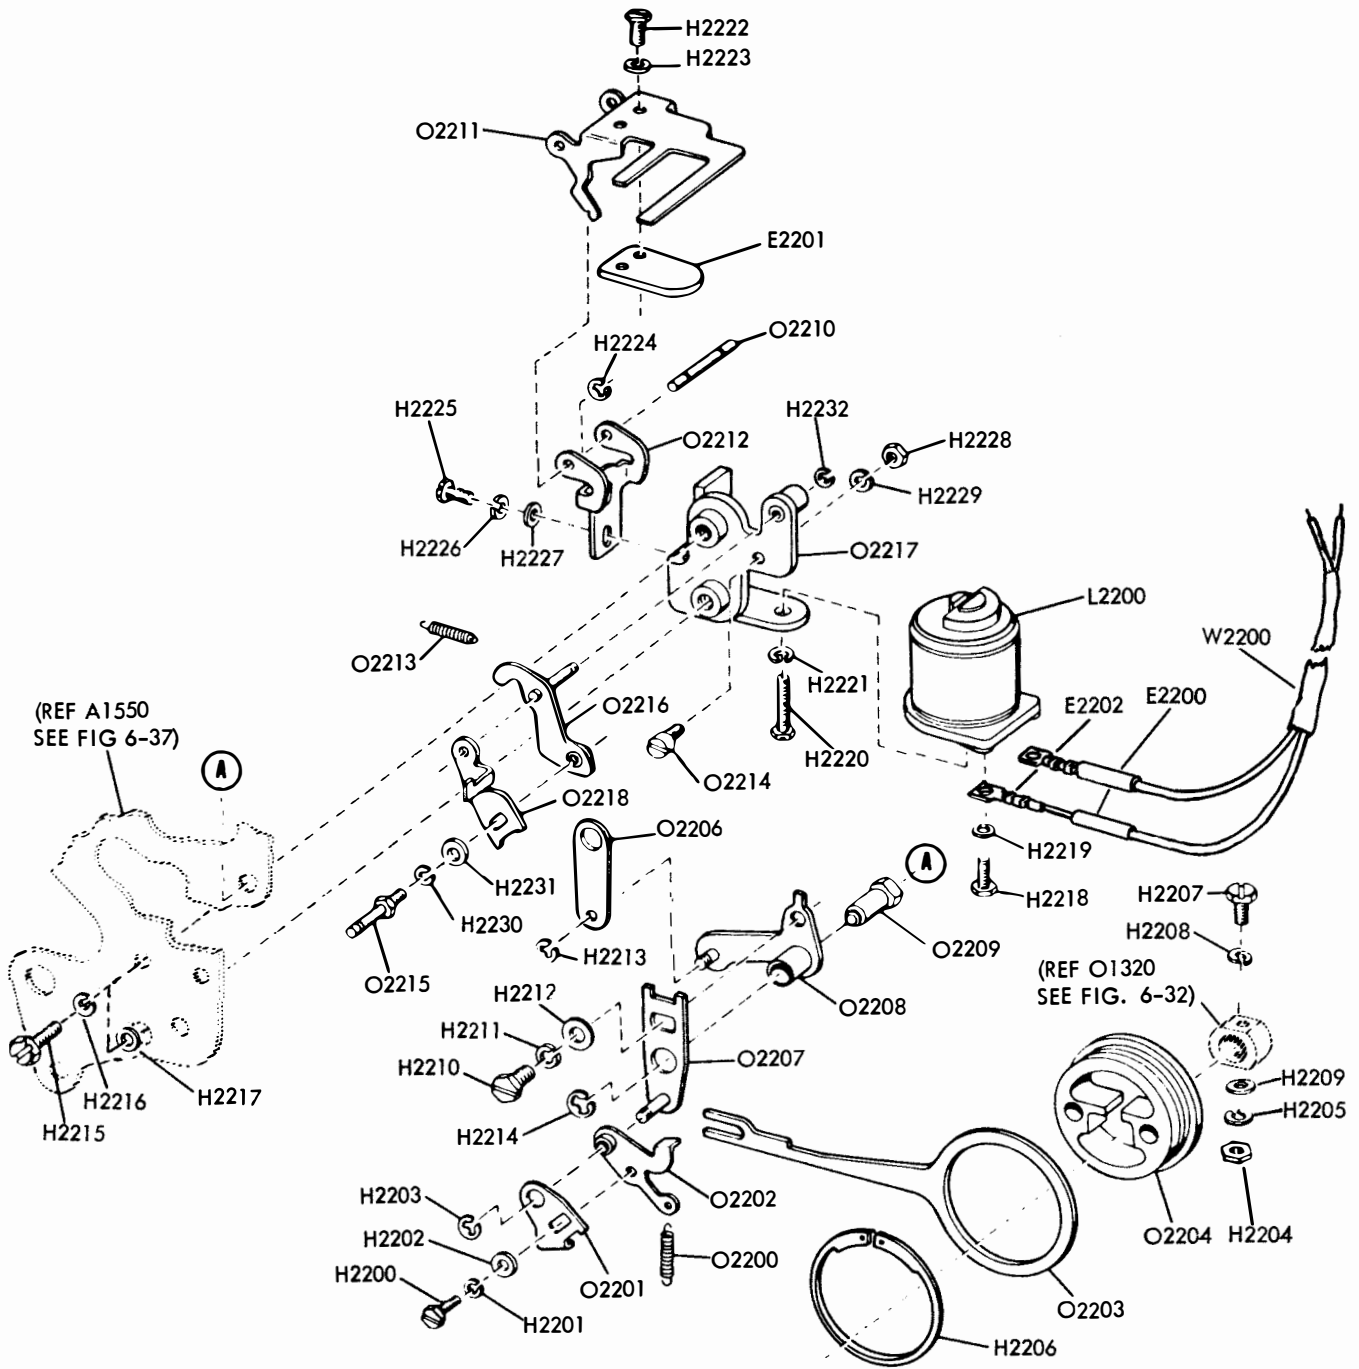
Typing Reperforator, Power Drive Back Space Mechanism
